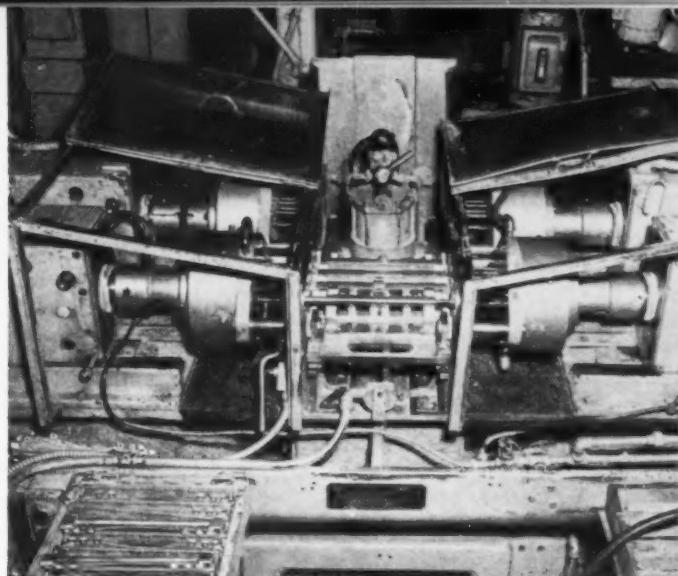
Semiautomatic machine for drilling, tapping, and reaming holes in electric typewriter diecastings. Because of close center distances, gearless heads are used. Though only two are shown, this machine normally handles four castings.
